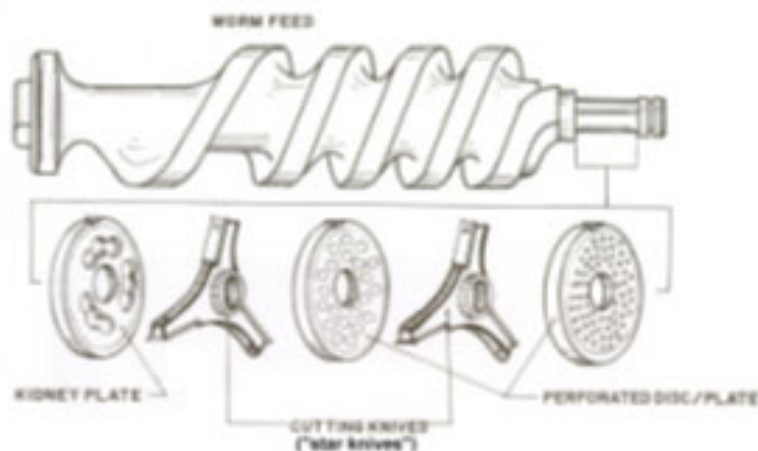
Grinder: Worm feed (feeding worm/auger) and cutting set with plates and knives (system "Unger")
